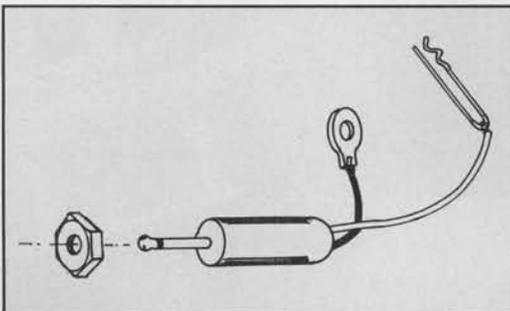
This is how to make a remote glow plug extension to fit a Ni-Starter connector. Solder a 6-32 nut onto a Radio Shack 3/32 or 1/8-inch audio jack. Solder a lug onto one wire and bolt it underneath the engine mount. The other wire is soldered to a metal clip that clips onto the glow plug.
